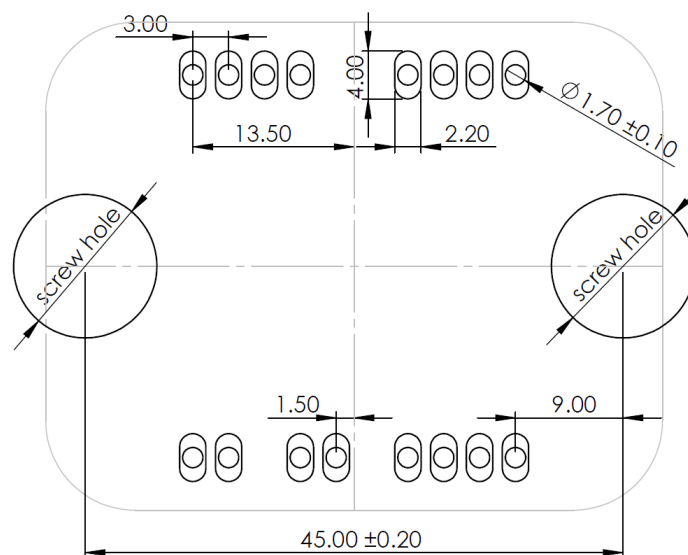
Recommended Module PCB Footprint (all dimensions in mm)
